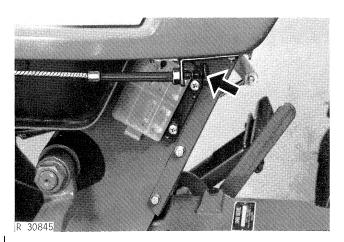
Decompression Cable (Early Model *Tractors Only)
